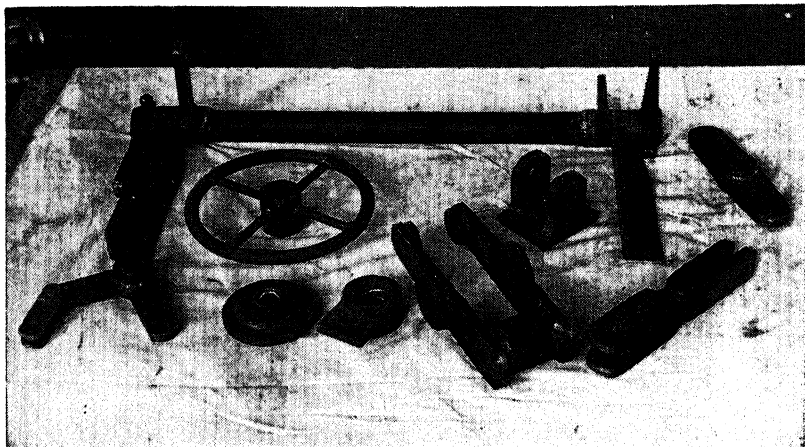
A few miscellaneous welded parts used in the construction of the draw-works shown in Fig. 1307.
